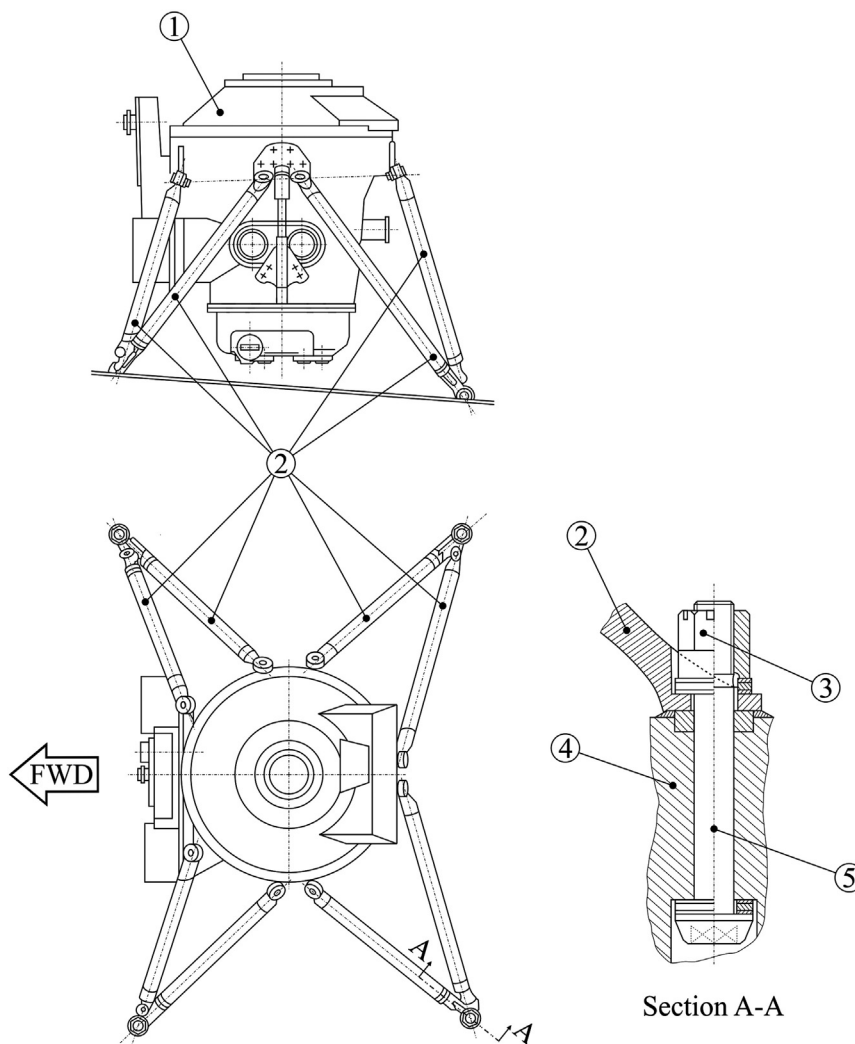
Schematic drawing of the main gearbox support assembly and longitudinal section through the bolt of the aft left support strut: 1 - helicopter main rotor gearbox; 2 - support strut; 3 - castle nut; 4 - reinforced airframe no.10; 5 - bolt.
